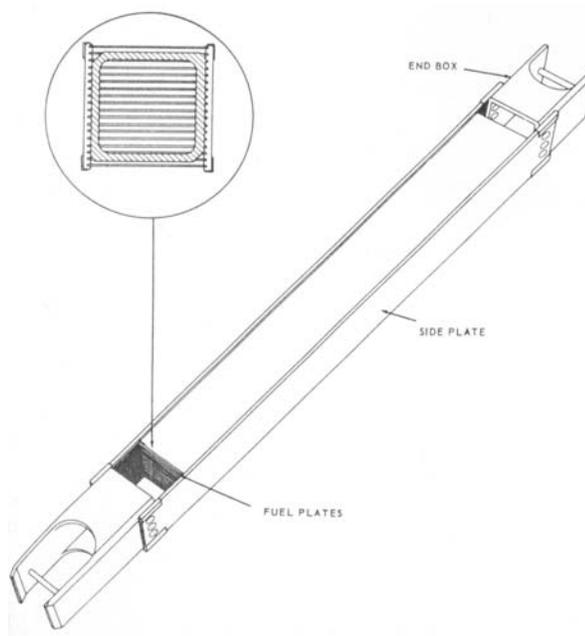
Isometric view of a typical MTR-type fuel assembly.
